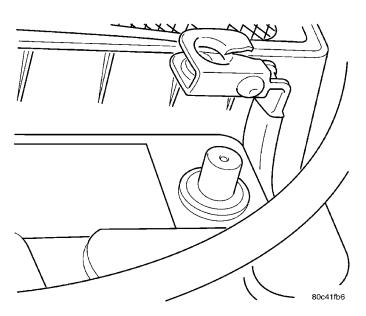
BATTERY NEGATIVE CABLE - REMOVE/ INSTALL
